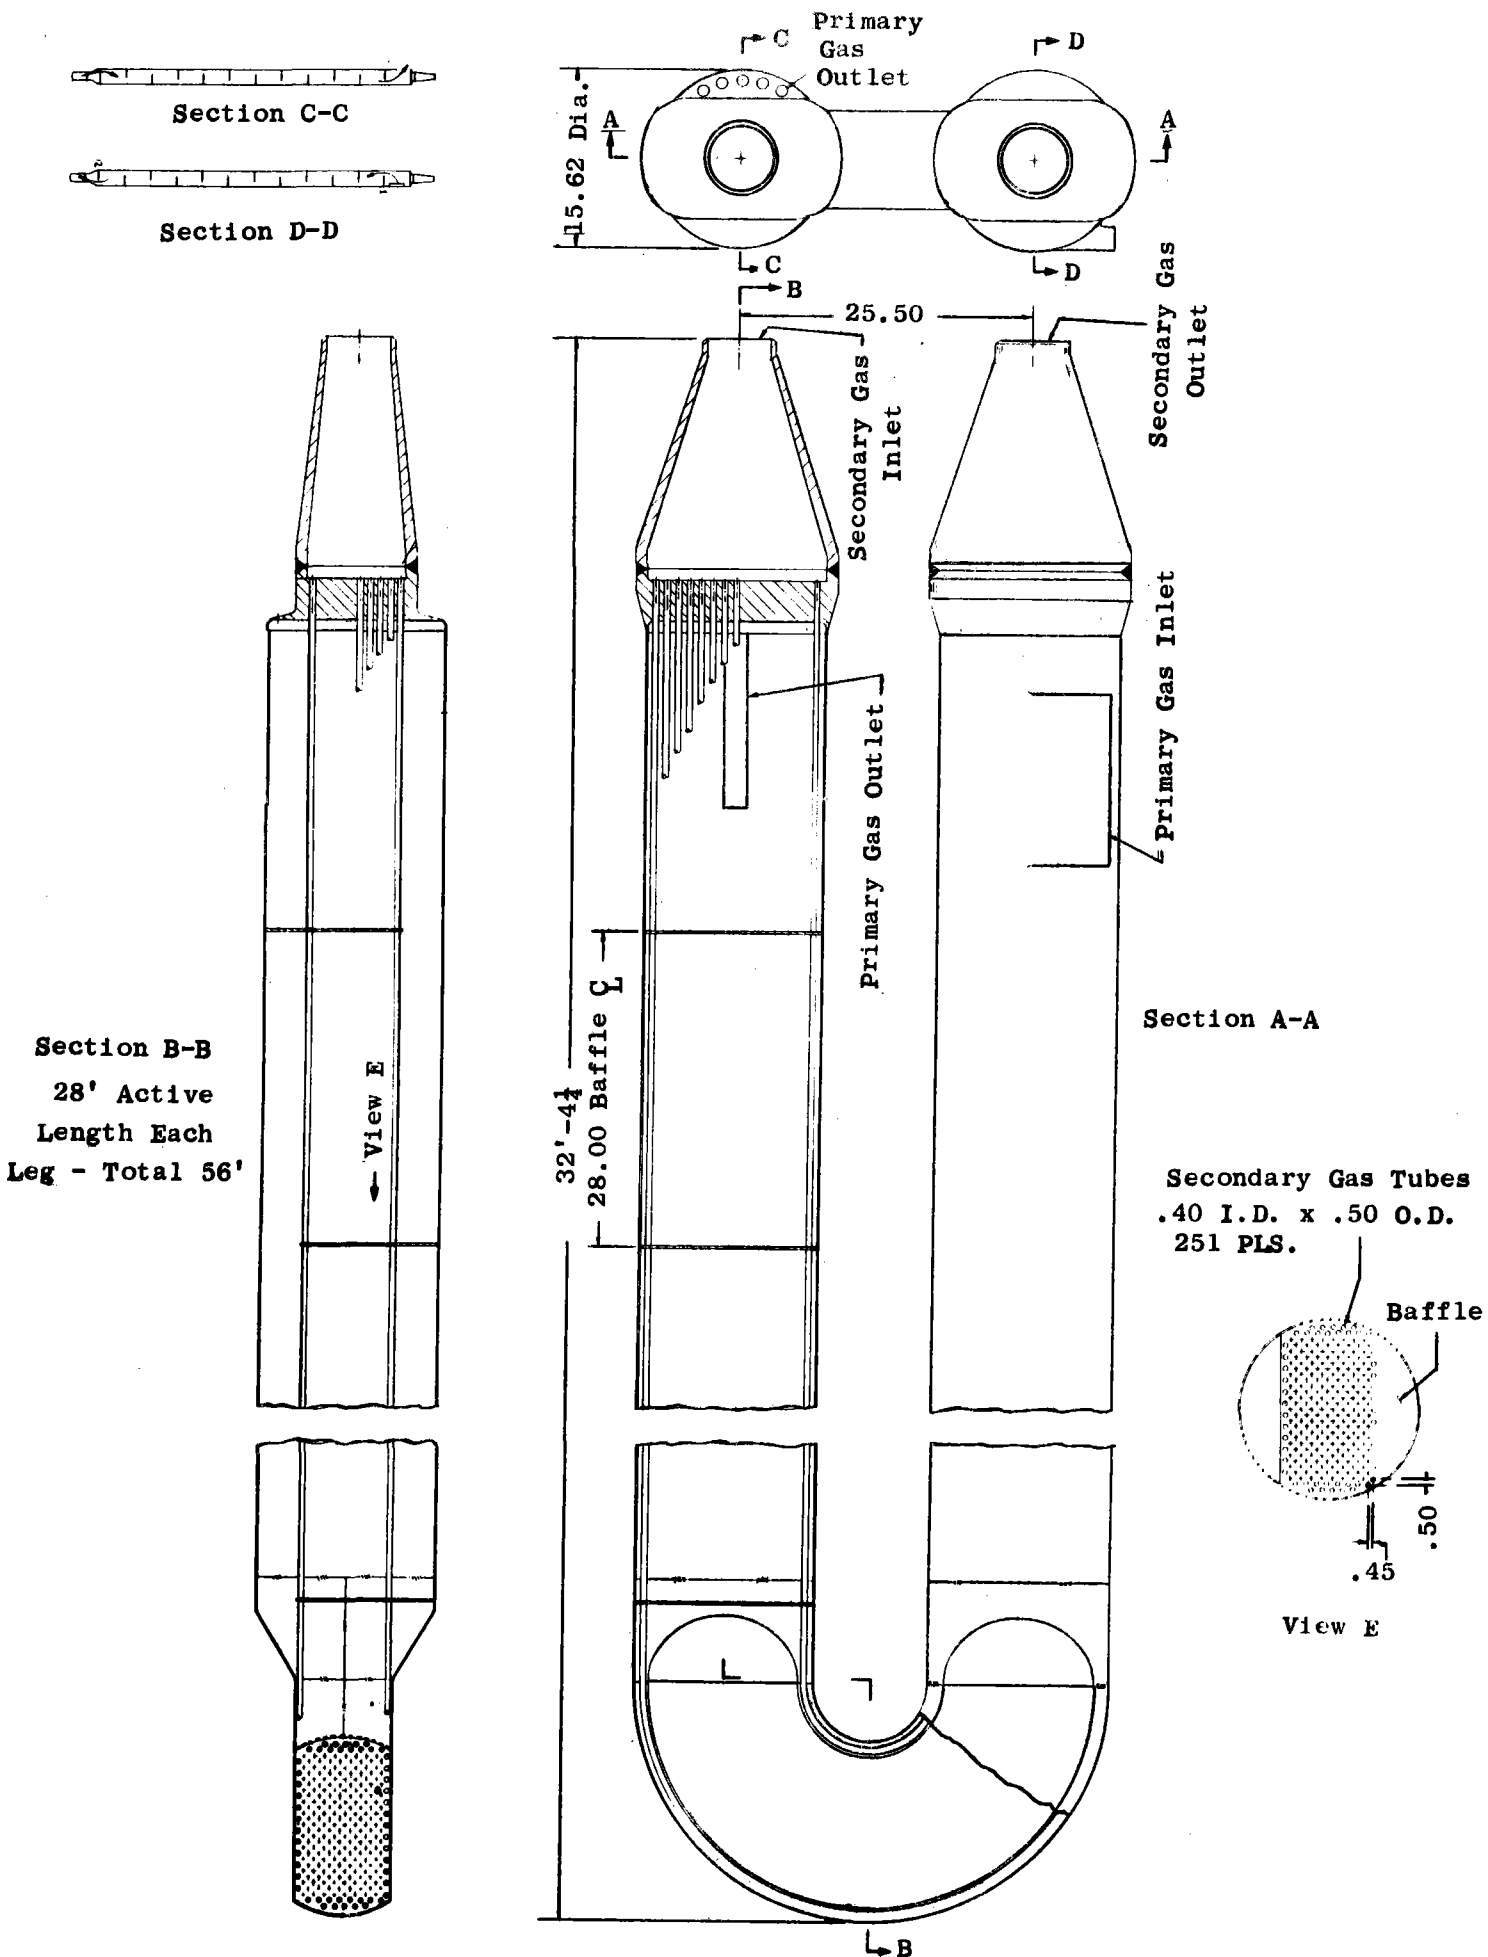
Module Assembly Drawing for Reference Design IHX (U-tube Concept).
